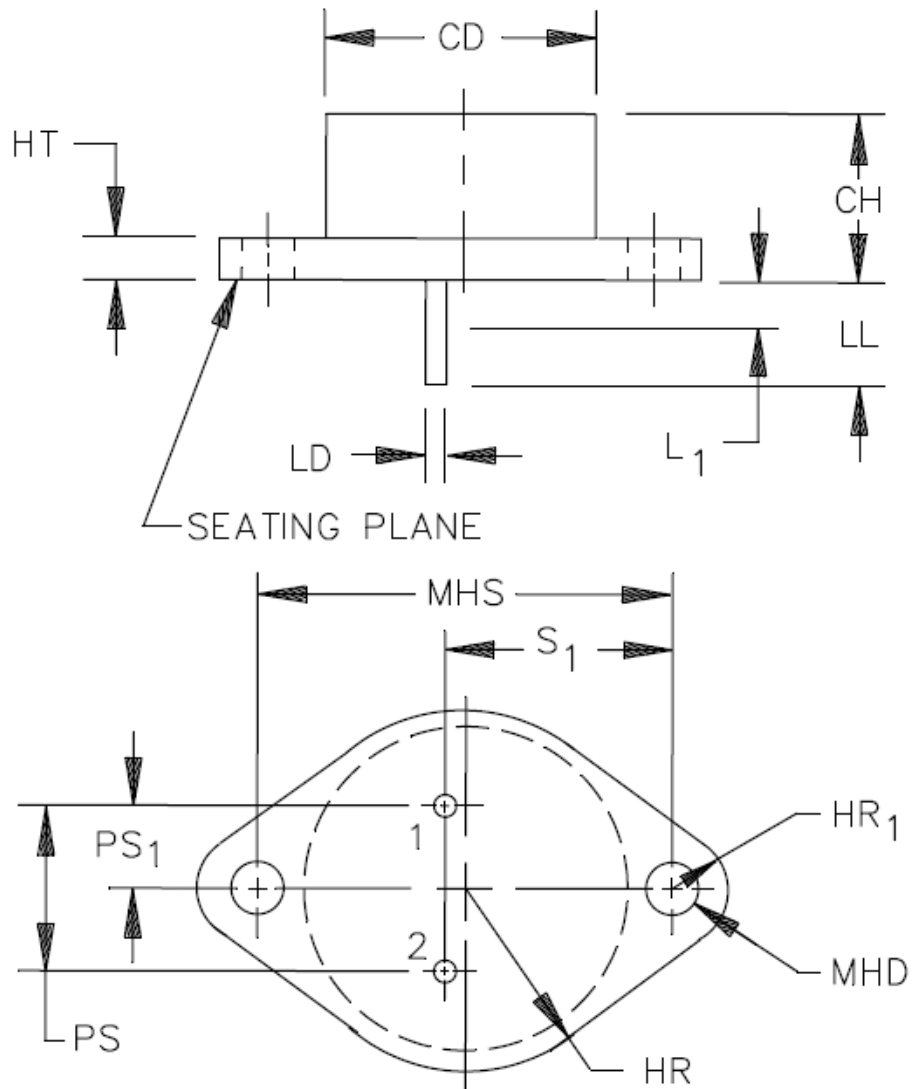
Physical dimensions (TO-204AA, similar to TO-3).
